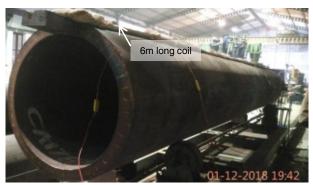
Arrangement of induction heater for pre-heating of longitudinal welding joint of pipe
